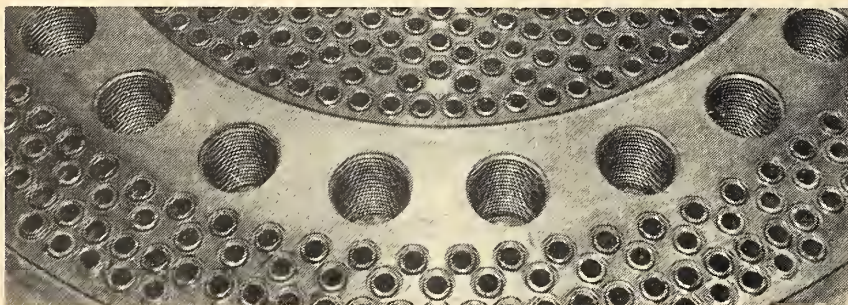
Welding of tube ends as completed over a portion of feed heater tube plate.
